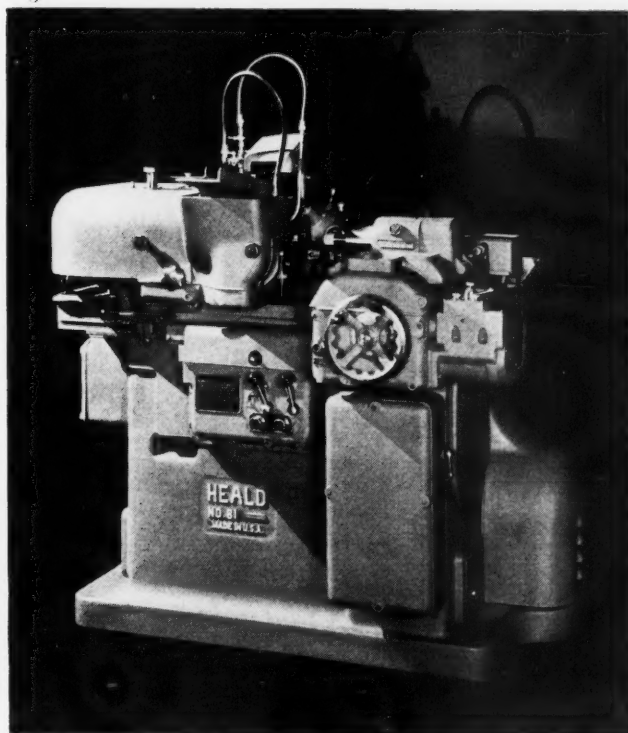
An Internal Grinding Machine of Centerless Design that will Finish Straight or Tapered Open, Interrupted, and Blind Holes
